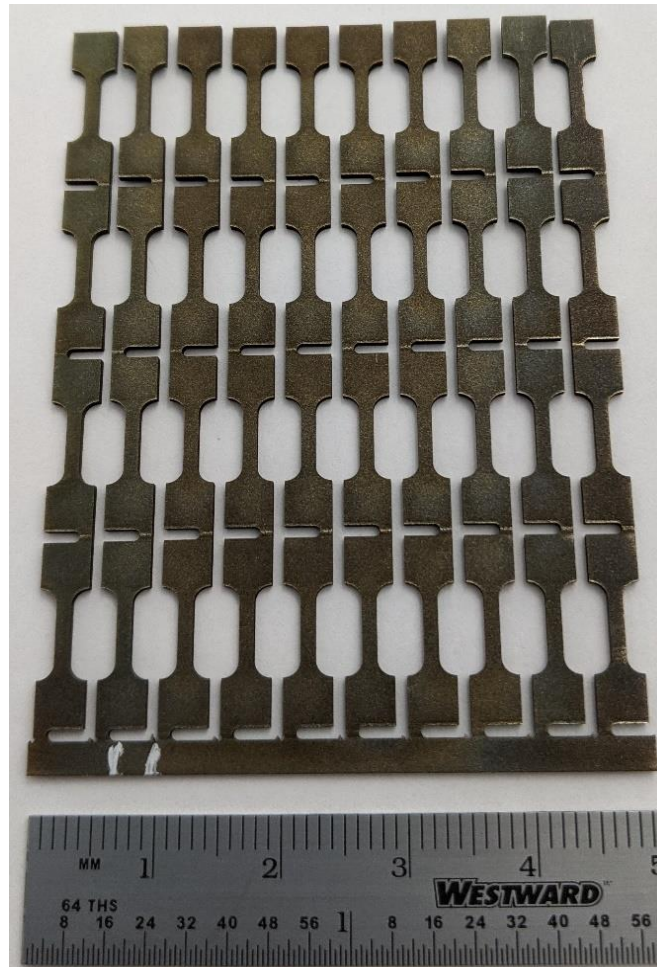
Specimen array after EDM cutting of a sheet sliced from a 5 mm thick as-built plate.
